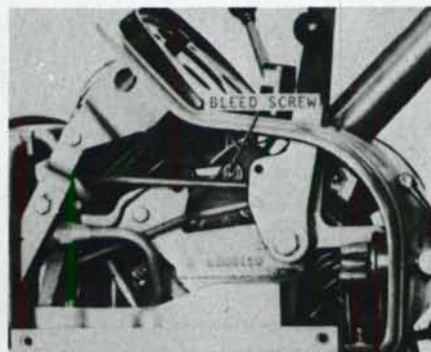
Cowling removed to show steering valve bleed screw. Refer to paragraph 7 for procedure.
